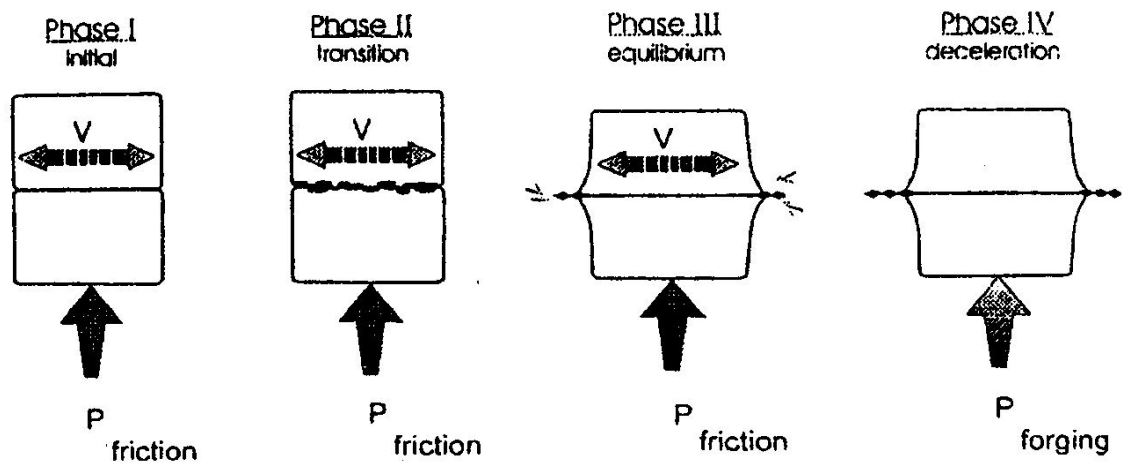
18: The four phases that characterize linear friction welding
